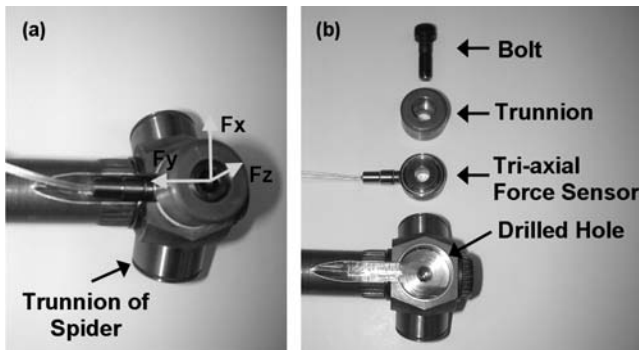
Installation of triaxial force transducer inside of a CV joint: (a) assembled and (b) disassembled.
